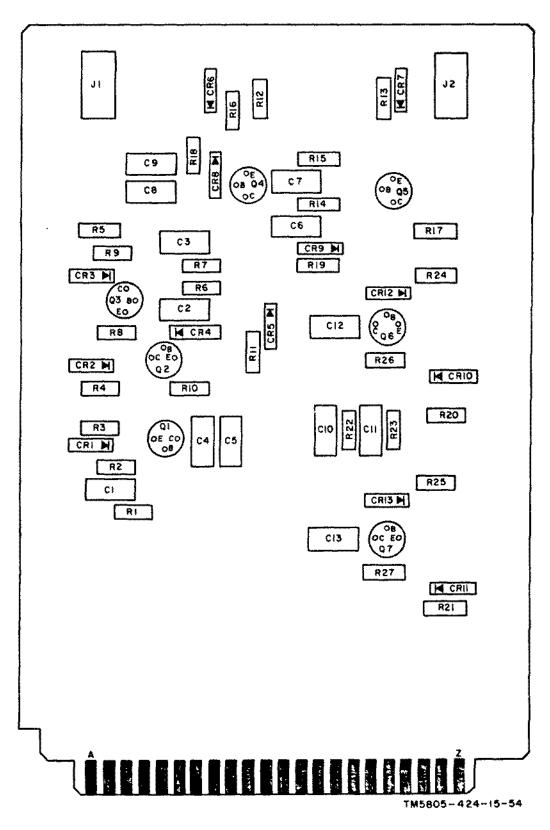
Printed-it card assembly A18A2, A19A2 (PC 80034200), component location diagram.
